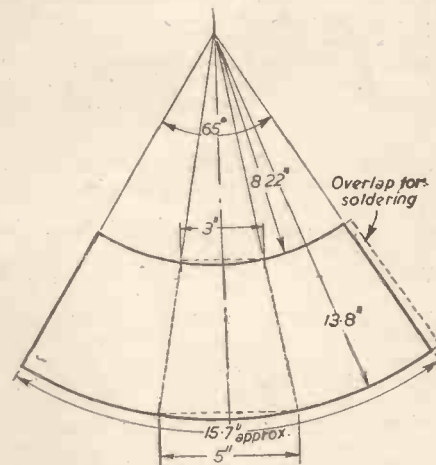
The setting out of the cardboard blank for forming the shade.
